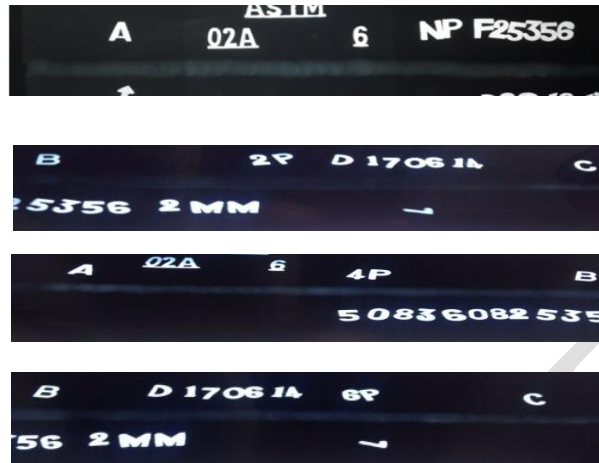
Radiography images of AA 6082 and AA5083Weldments using AA5356 filler wires
